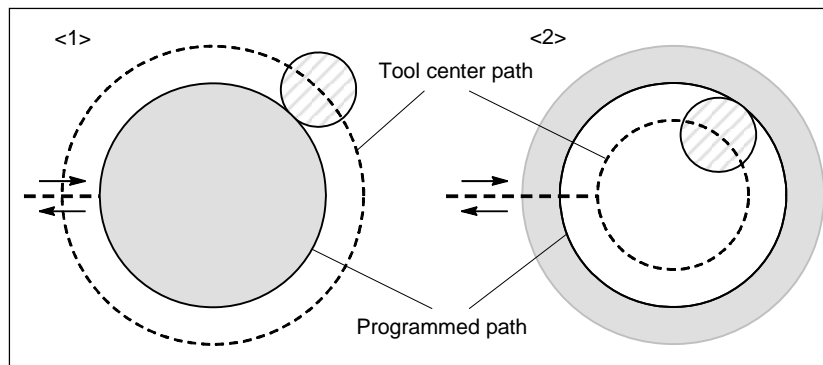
(d) Tool center paths when positive and negative cutter compensation values are specified
